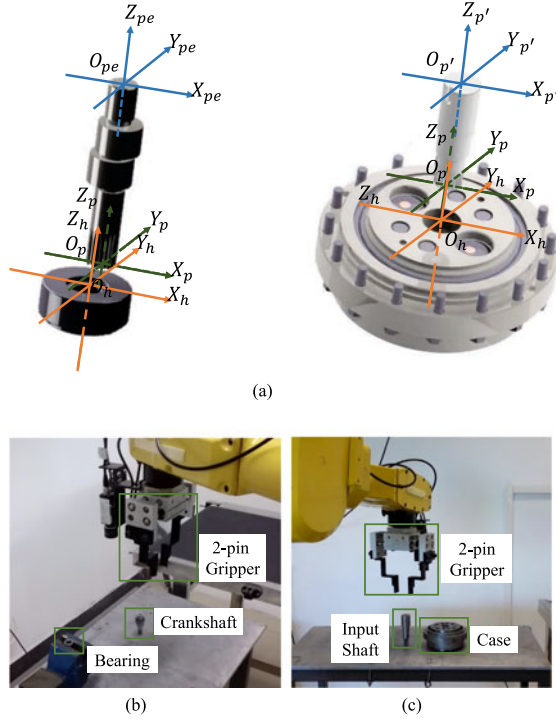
(a) CAD models for the eccentric crankshaft-bearing insertion and the input shaft insertion. *Left:* The diameter of the lower part of the crankshaft is 9.75 mm, and the inner diameter of the bearing is 9.80 mm. *Right:* The diameter of the input shaft is separately 29.50 mm, 26.50 mm, and 22.50 mm (from top to bottom), and the inner diameter of the upper surface of the flange is 30.00 mm. (b) Experimental setup for crankshaft-bearing assembly. (c) Experiment setup for input shaft case assembly.
